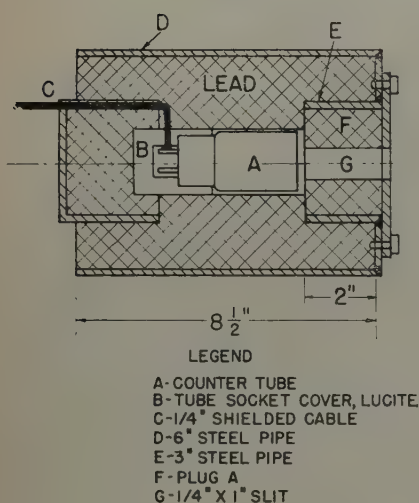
DETAIL OF COUNTING TUBE SHIELD.
